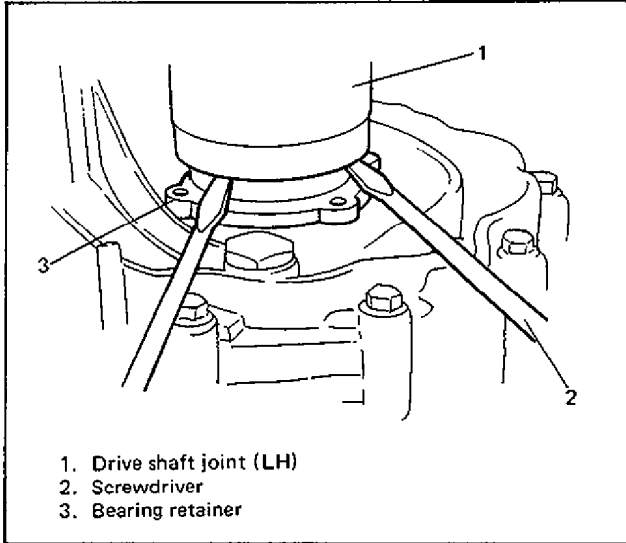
A-11 Detaching Left Side Drive Shaft Joint from Differential Gear
